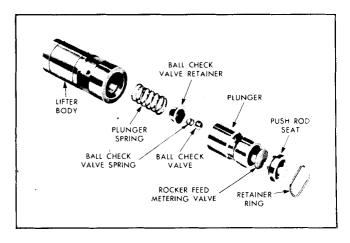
Hydraulic Valve Lifter - Exploded View
